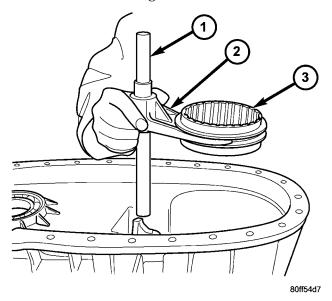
Install Mode Fork, Sleeve, and Shift Rail Assembly
